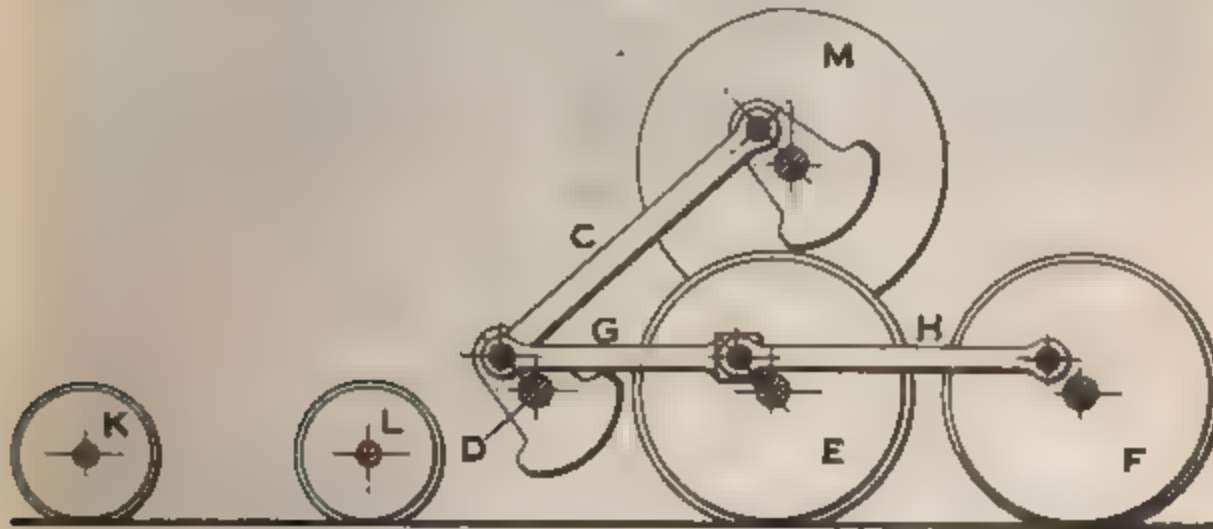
Plan of side-rod and crank drive employed in the "Pennsylvania" type of locomotive
